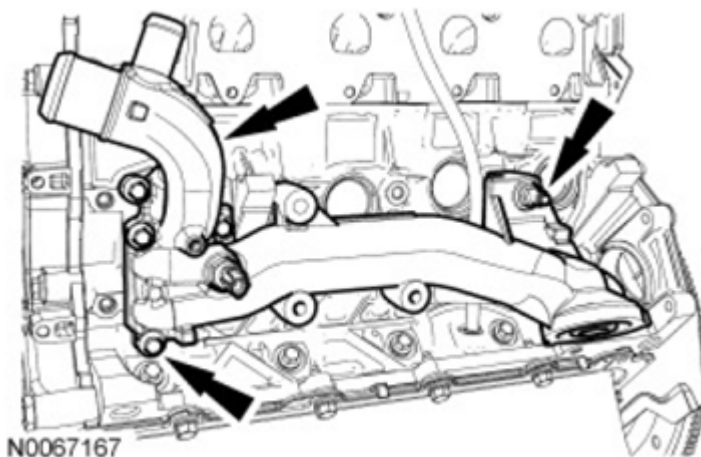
Locating Oil Filter Adapter, Gasket And Nuts
